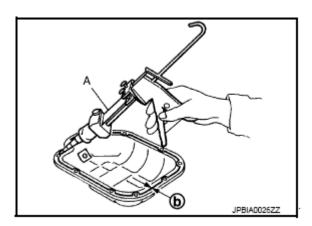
Applying Continuous Bead Of Liquid Gasket Using Tube Presser
